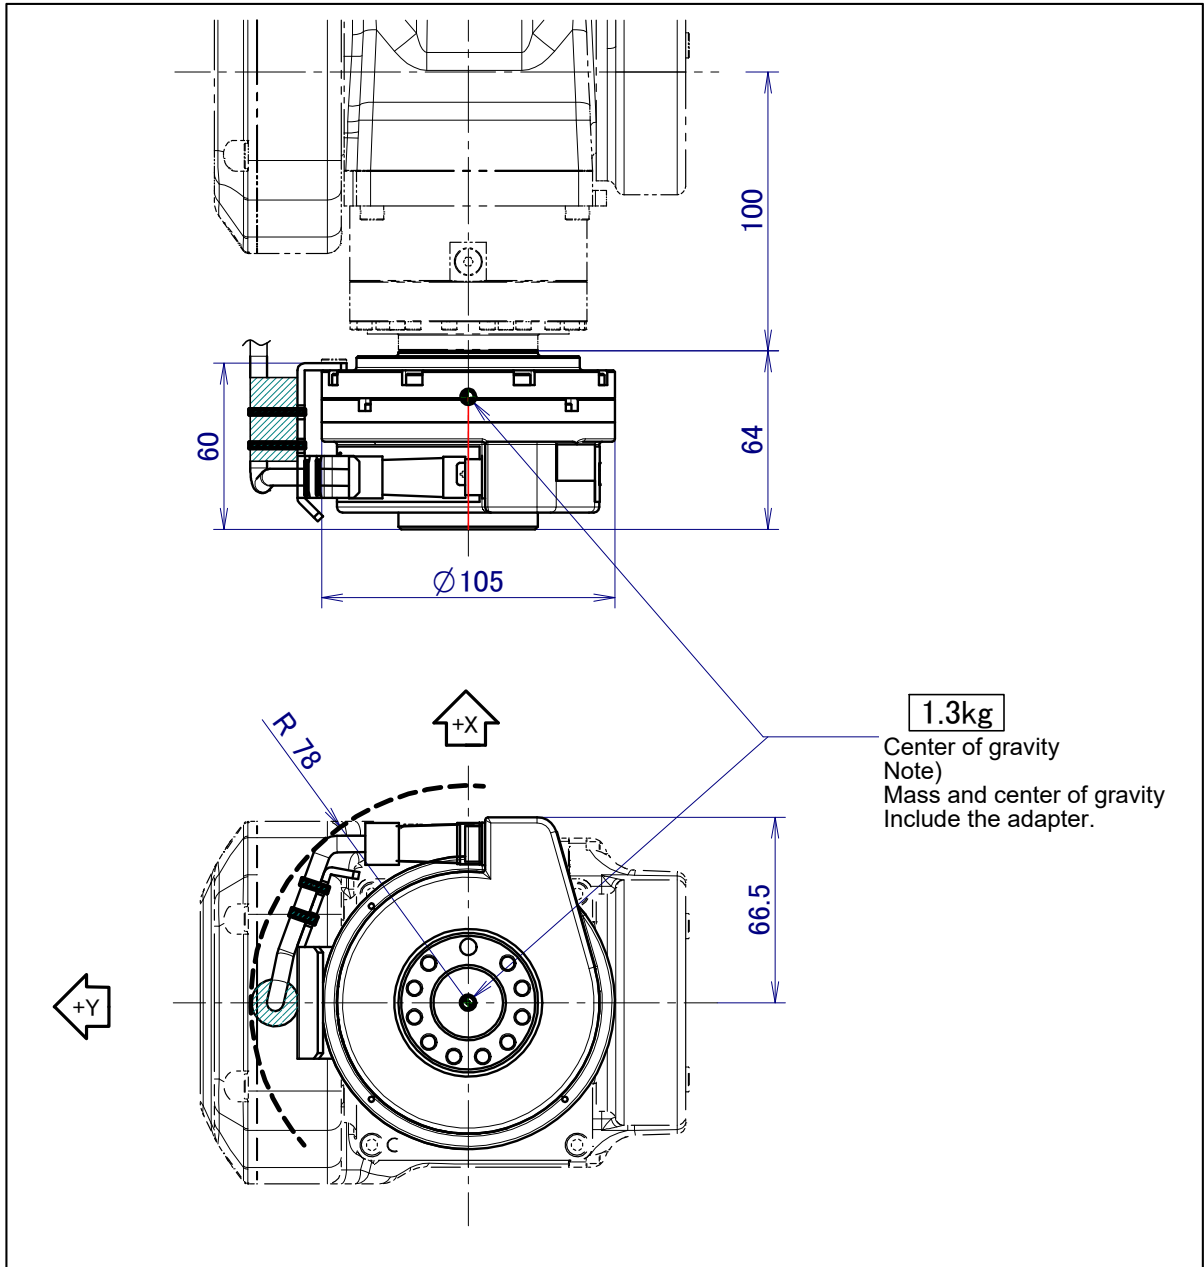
(d) External dimensions of the force sensor head
